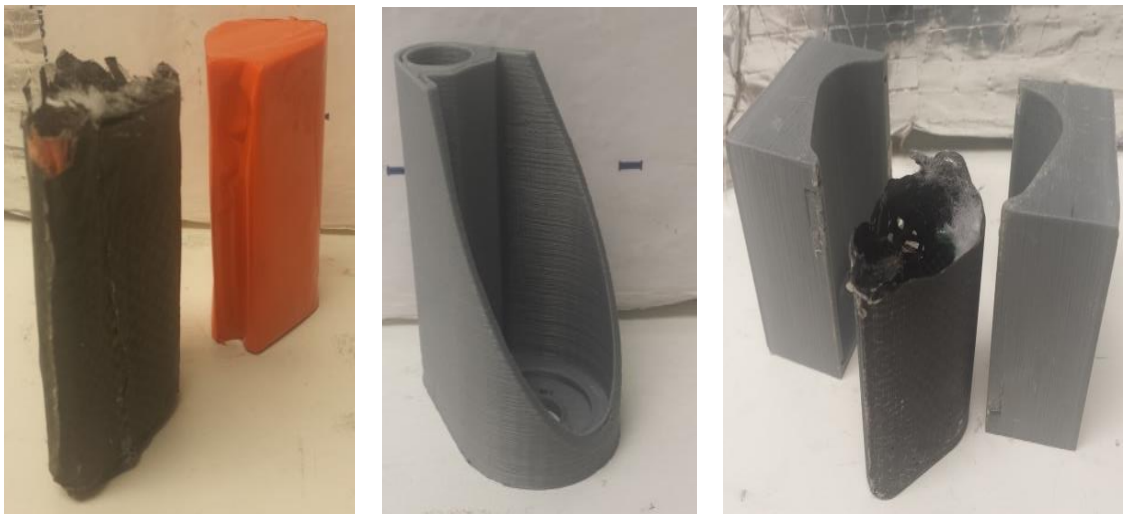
Male-molding (left), 3D Printing (center), Female-molding (right)
